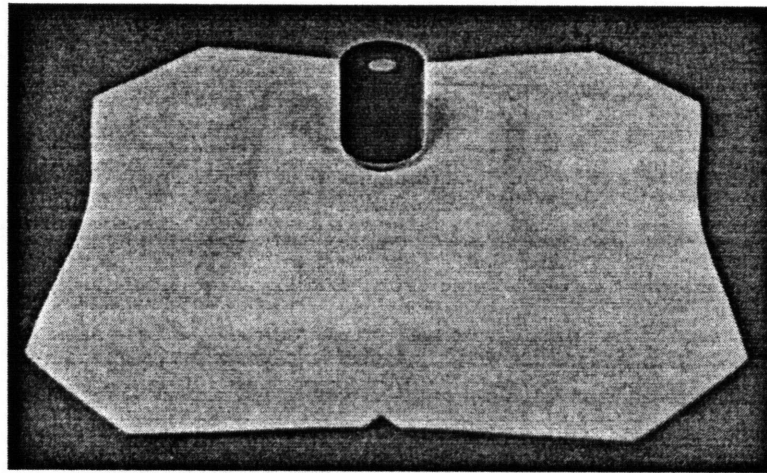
Coated Sheet Metal Part with Reference Mirror
